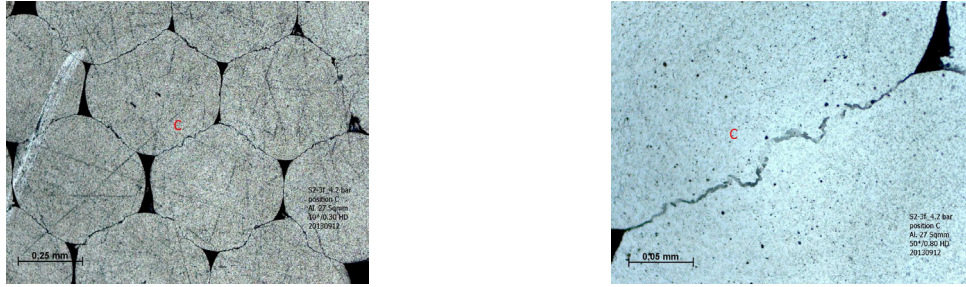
Microsection of weld sample with 4.2 bar (left), magnification of position C (right)
